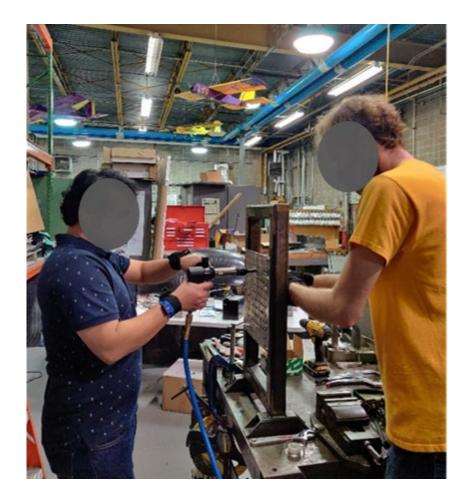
Riveter holding the Rivet gun (Left), bucker (Right)
